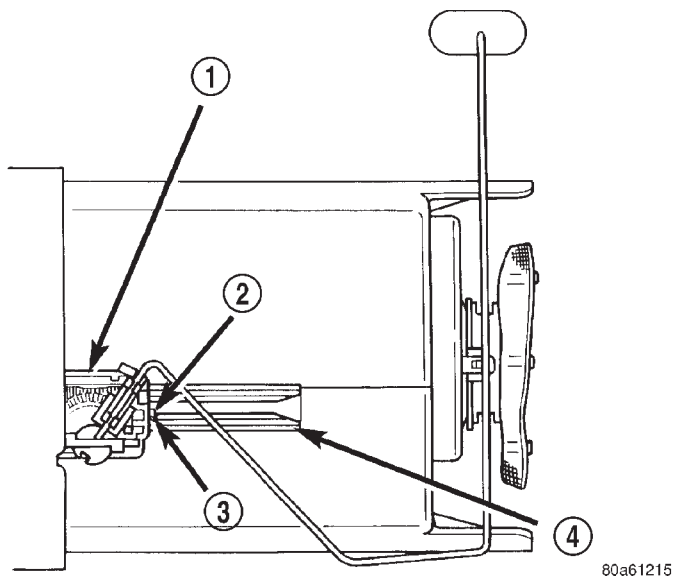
Fuel Gauge Sending Unit Lock Tab/Tracks—2 Door Models
